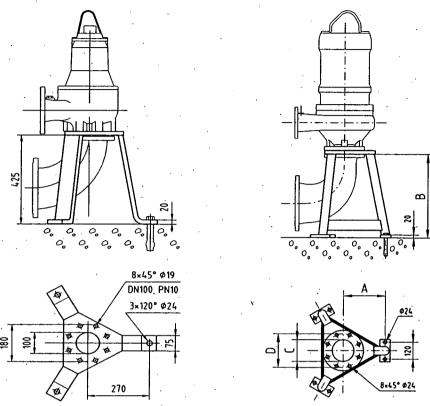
Vertical dry installation stand dimensions. The variable dimensions are given in table 5.4.
